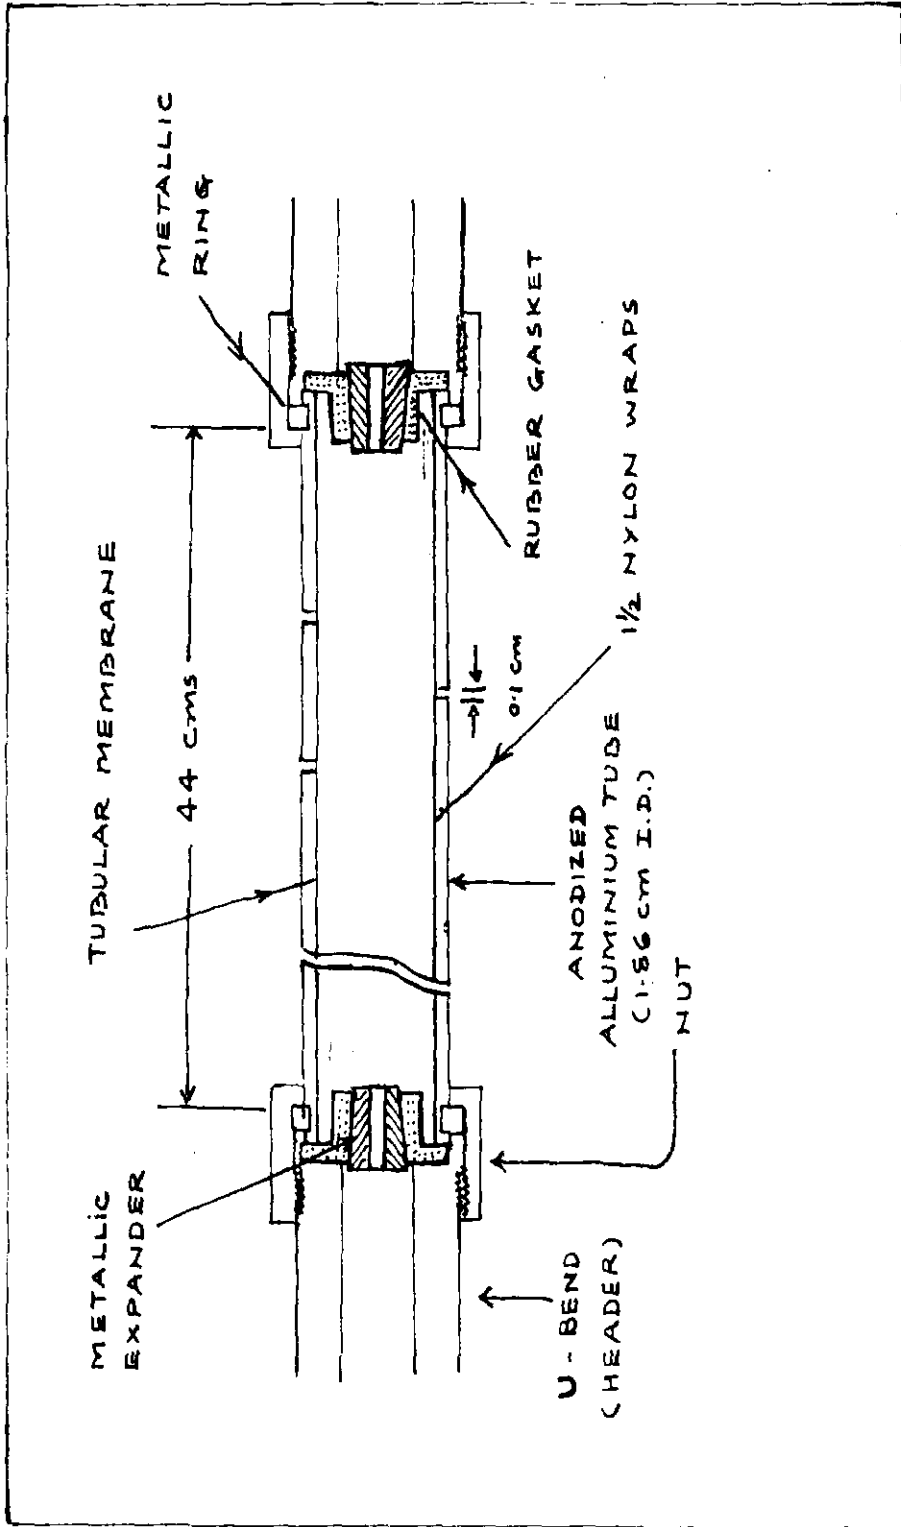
CROSS SECTION OF TUBULAR ASSEMBLY.
